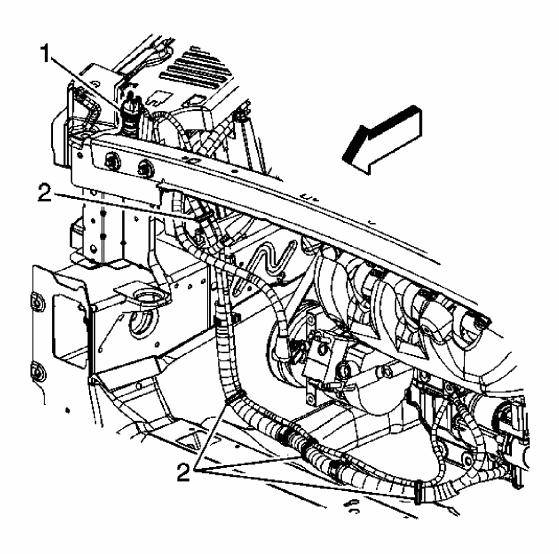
Identifying Coolant Heater Cord (RPO L26) Courtesy of GENERAL MOTORS CORP.
